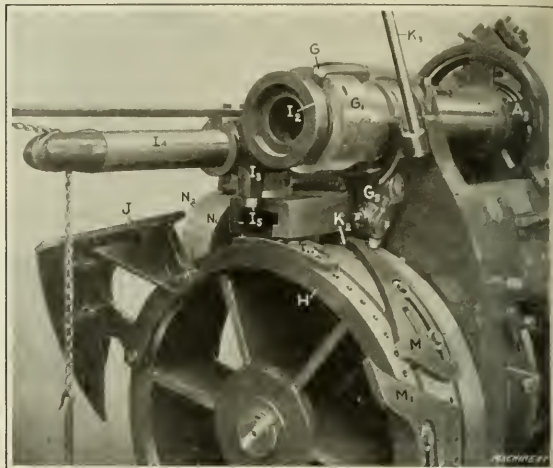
Front End View of Gridley Single-spindle Automatic Turret Lathe, showing Stock-pusher Operating Cam out of Engagement with Operating Roll
